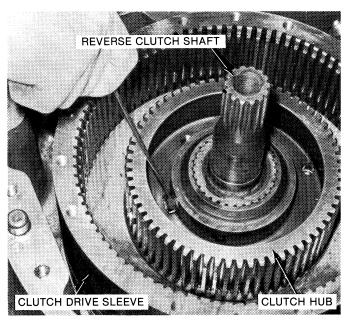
Removing or Installing Dowel Pin Screw on Clutch Hub.
